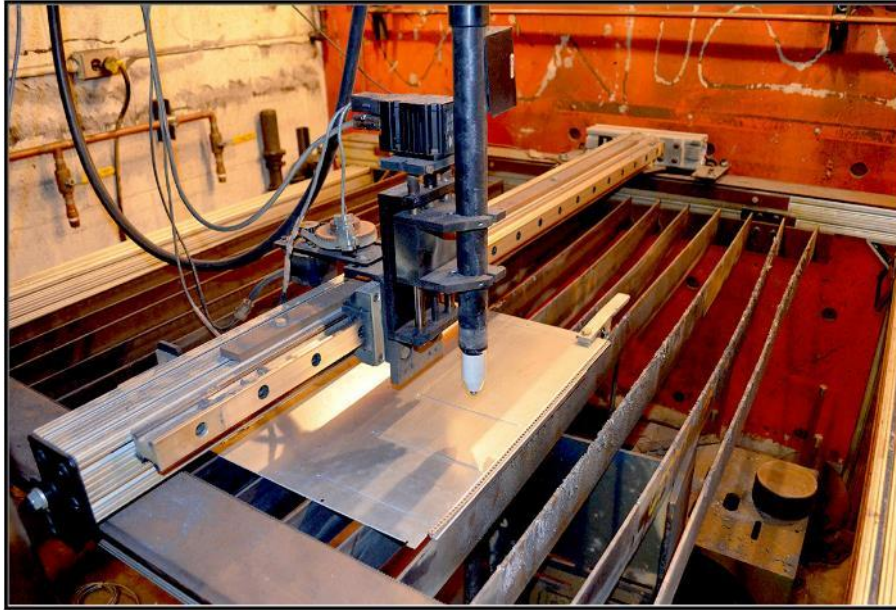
Plasma Cutter Machine with a sheet-metal work piece
